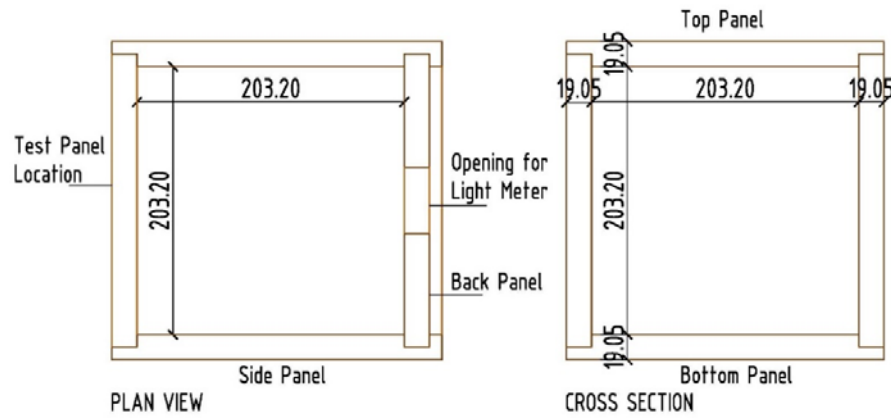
Light-tight box design. [Dimensions are in millimeters.]
